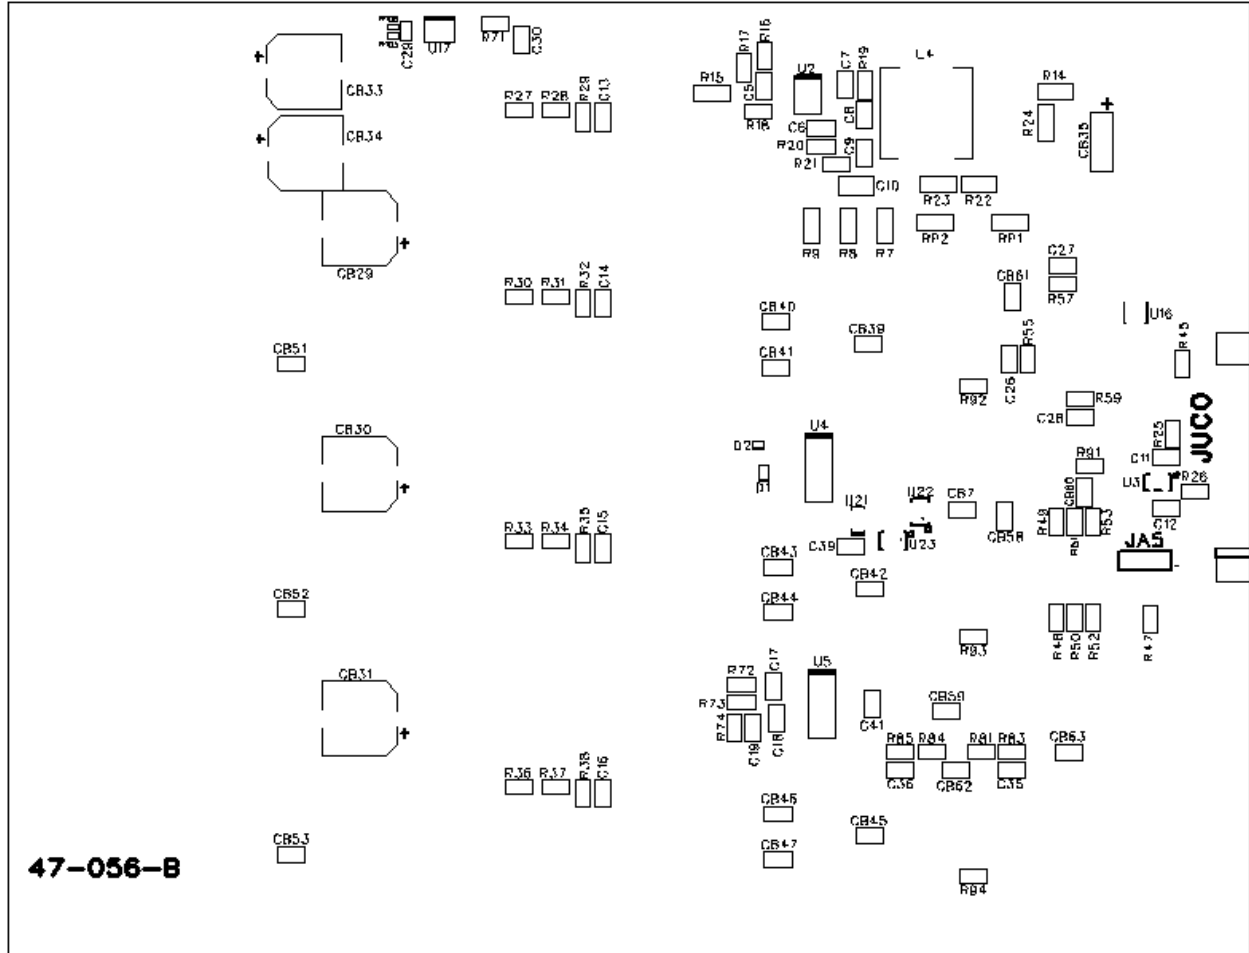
EPC7C006/FBS-GAM02 3-Phase Motor Driver Eval. Board Bottom Solder Mask.
